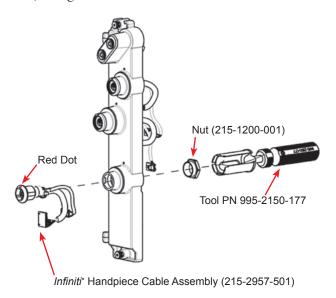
Infiniti* Handpiece Cable Assembly Removal
